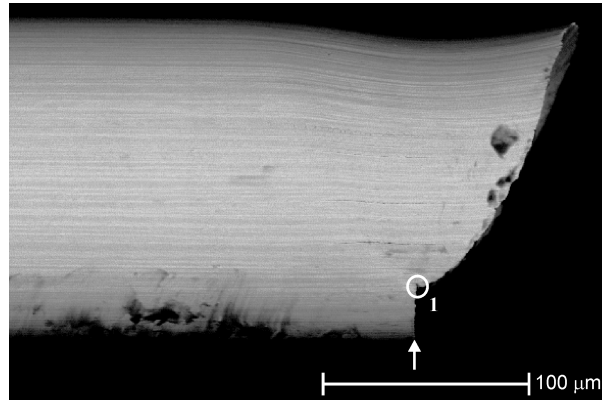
Growth of long fatigue cracks perpendicular to the wire axis.
